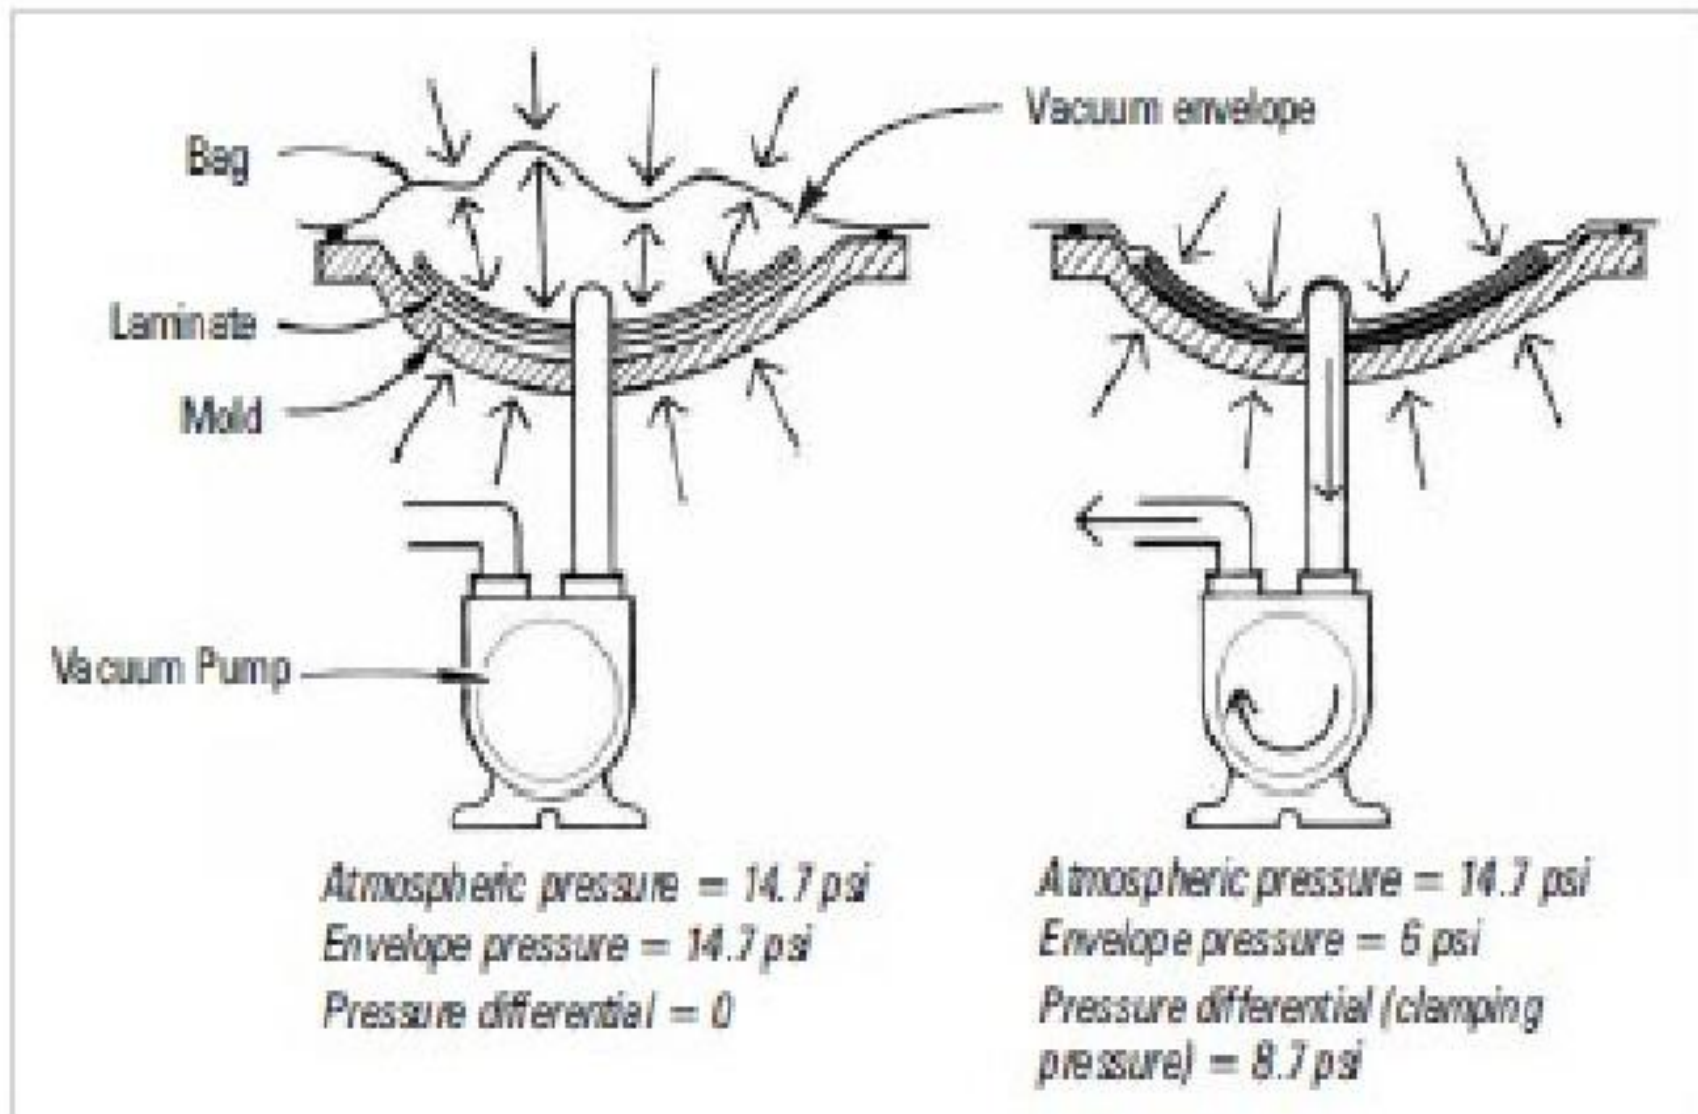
A typical vacuum bagging lay-up before and after vacuum is app
